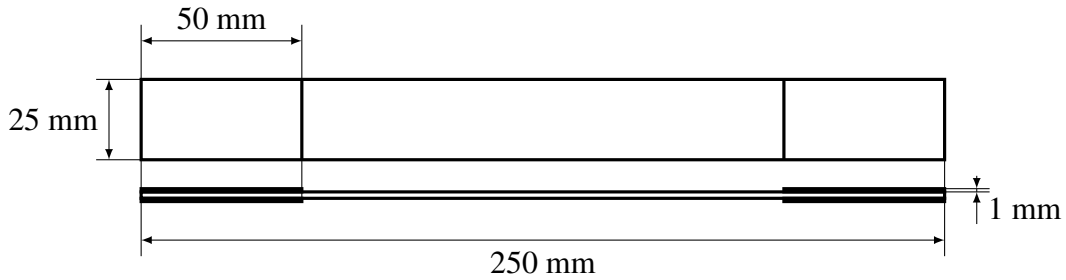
Tensile and in-plane shear specimen geometry.
